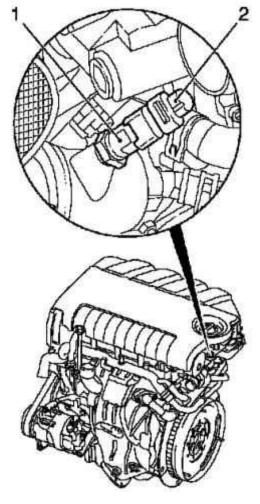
Coolant temperature sensor: 1 - Sensor 2 - wiring harness connector
